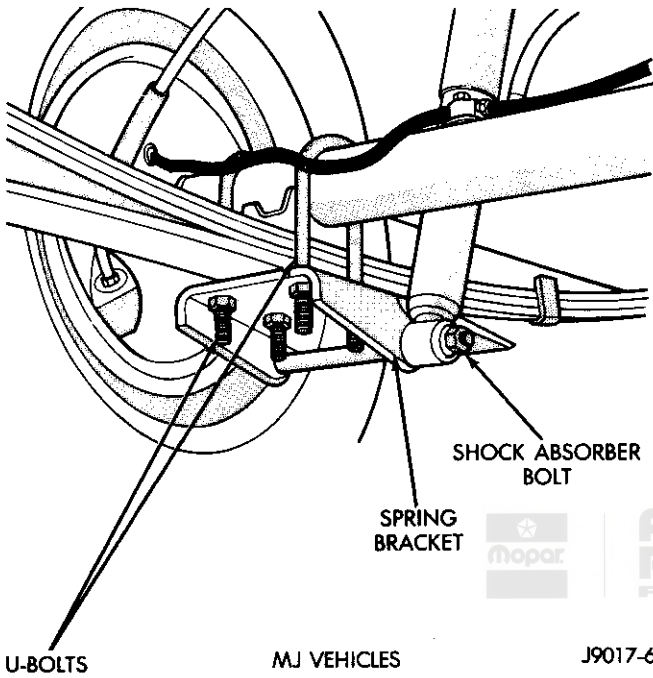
Rear Spring & Shock Absorber—MJ Vehicles
